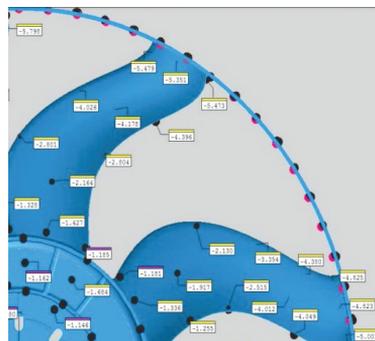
Fan dimensional accuracy, Part-to-CAD comparison
